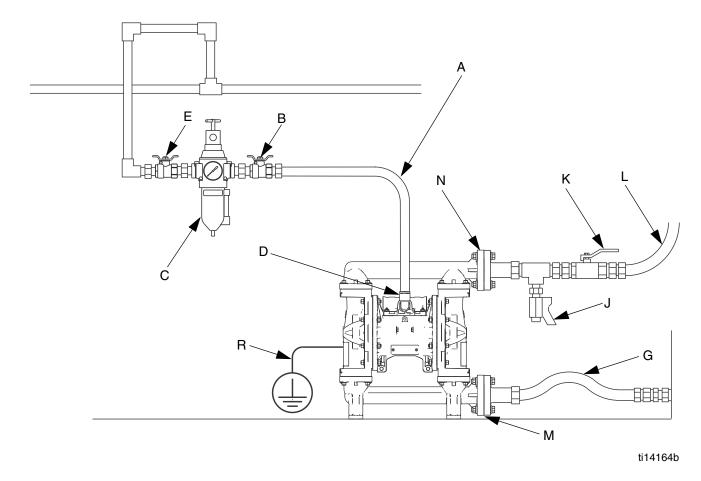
Typical floor-mount installation (polypropylene pump shown)
